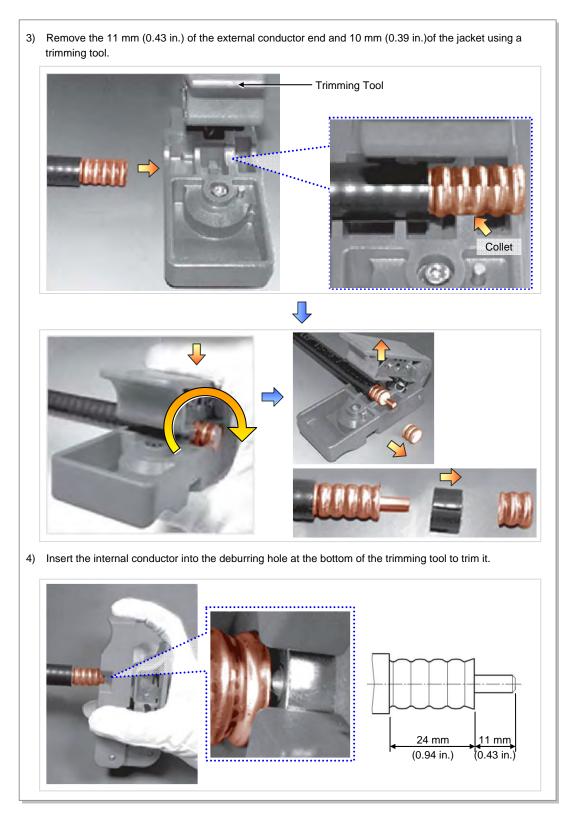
Assembling the N type-male (1/2 in. Feeder Line) Connector (2)
